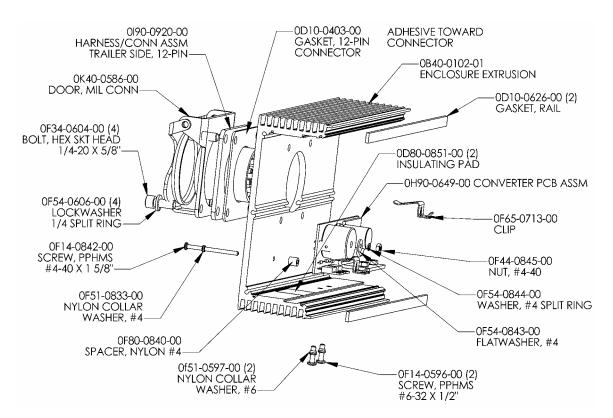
0N10-1038-00 Rear Module Sub-Assembly w/ Trialer Connector and Converter Module
